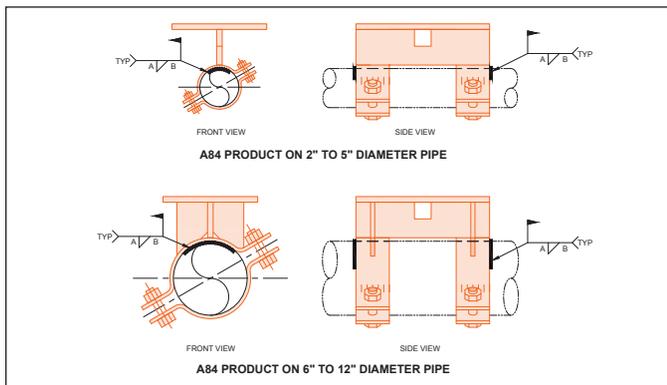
WELDING DETAILS FOR ENHANCED A84 CAPACITY
